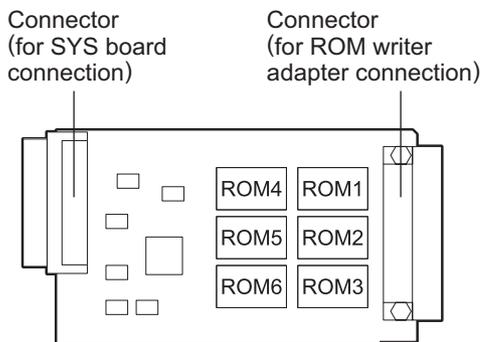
Jig board: PWA-DWNLD-350-JIG2(48 MB)
